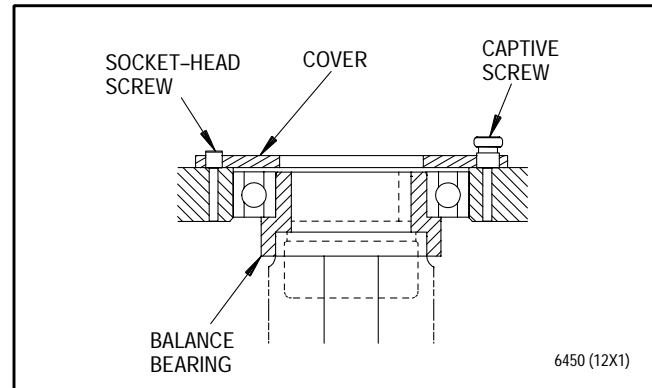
Front Compressor Drive Turbine Rotor and Stator Assembly - Balancing Tooling Removal (Sheet 1 of 6)
